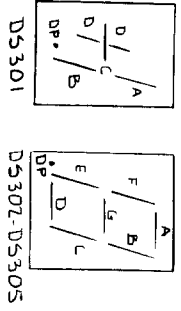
A1A1 8920A/8921A Display PCB Assembly
